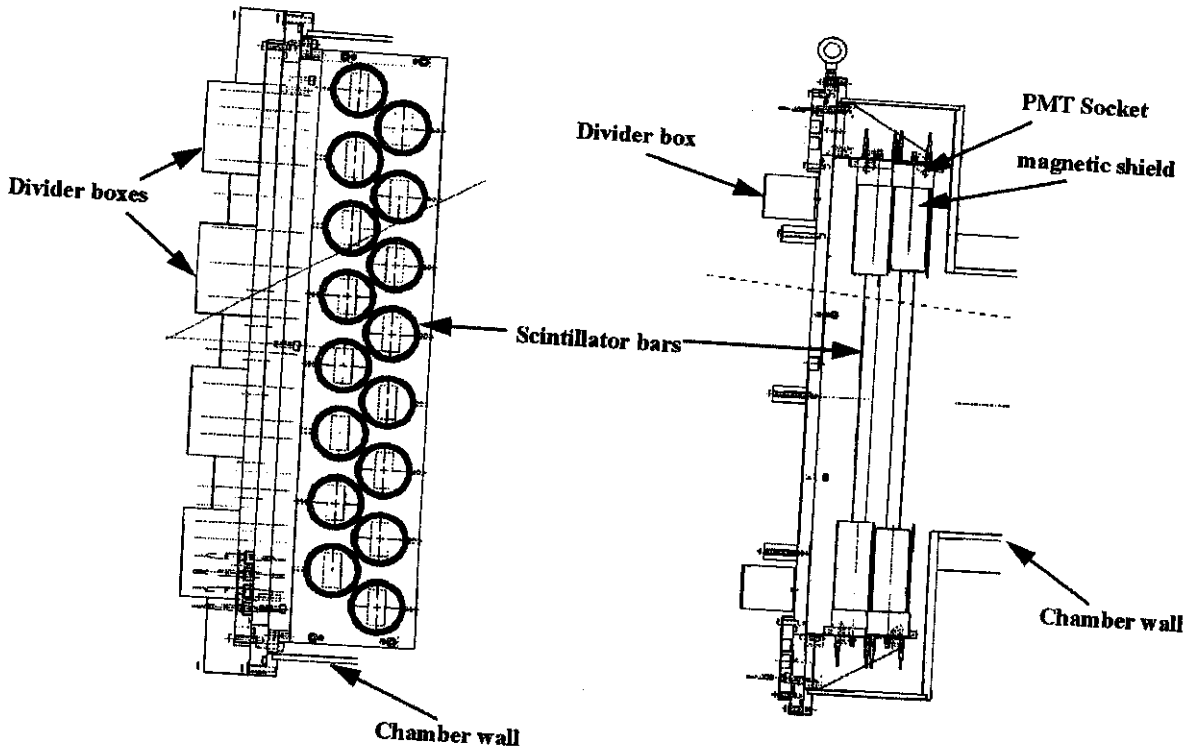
CAD drawings of the plastic scintillator array at the exit of the Beam Sweeping Dipole.
